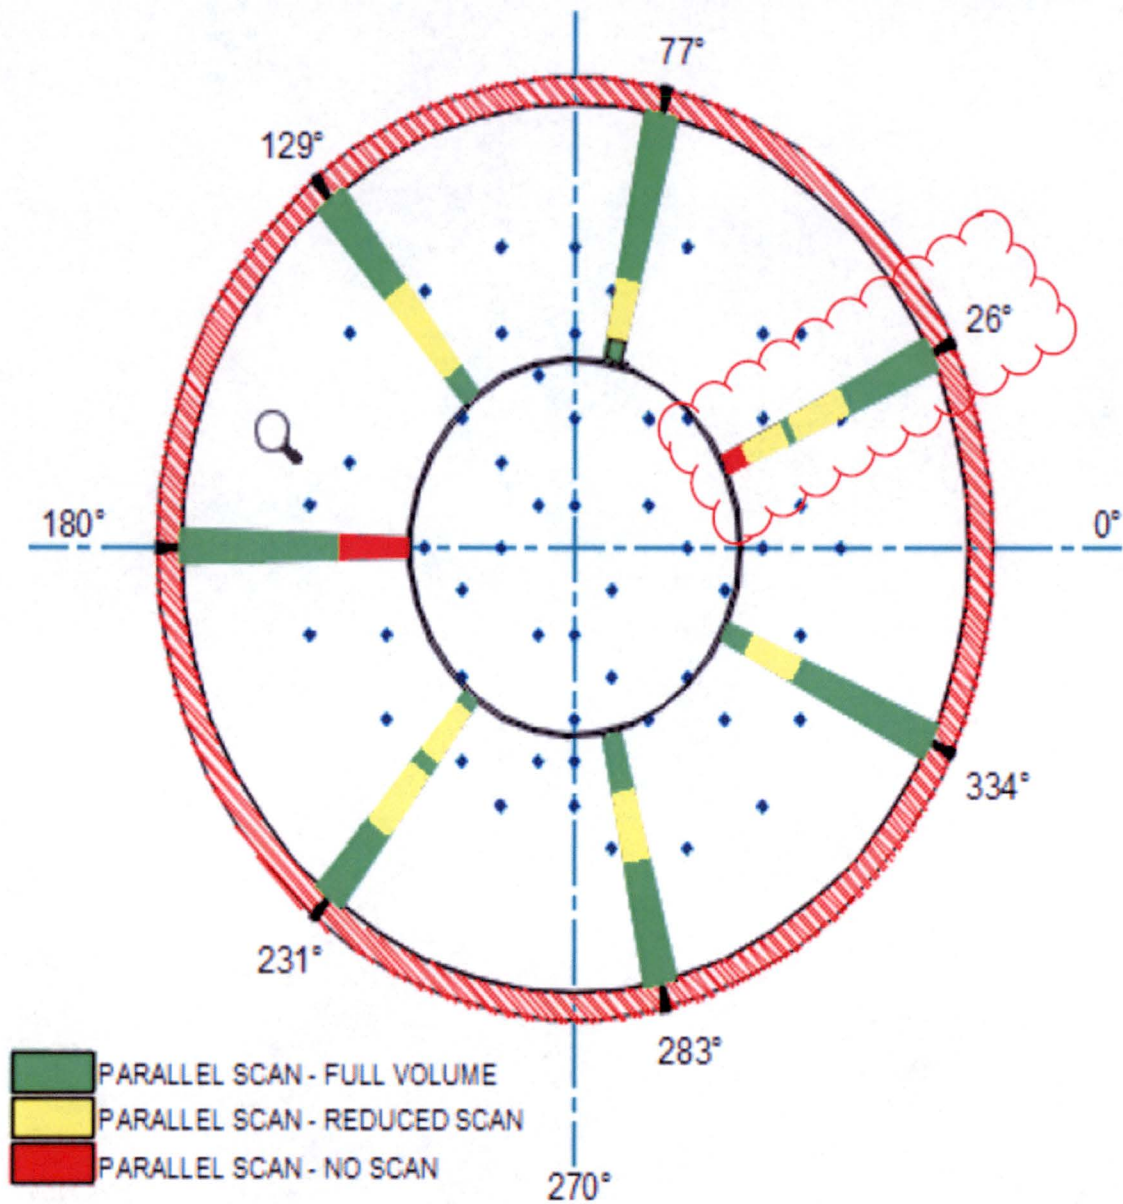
Weld 2-LHM-01 (Extracted from Reference DRAWING 2A-1)
